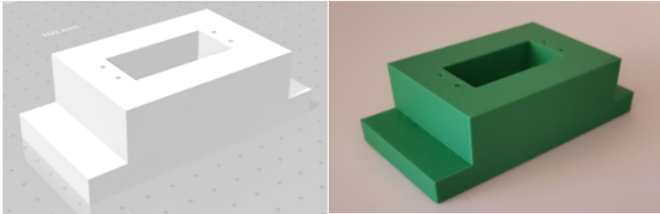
AFER SM 1 CAD rendering (left) and printed piece (right).
